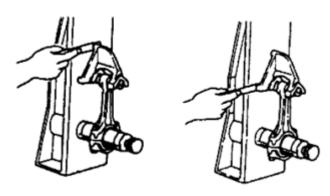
Checking Connecting Rod Alignment Courtesy of SUZUKI OF AMERICA CORP.
